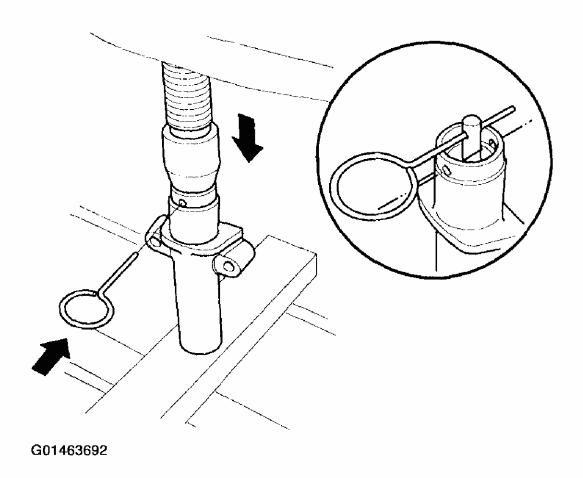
Aligning The Holes On The Rod & Housing Of The Auto-Tensioner Courtesy of AMERICAN HONDA MOTOR CO., INC.
